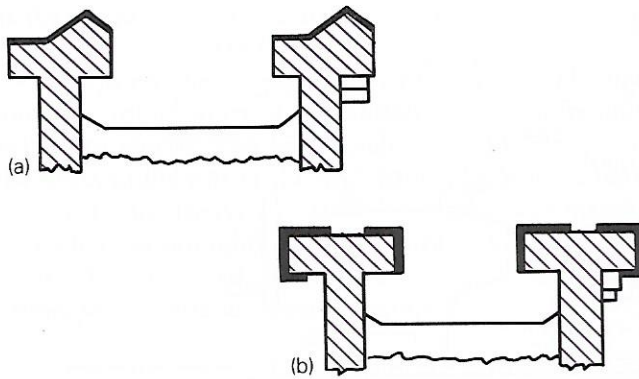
Types of lathe bed: (a) vee bed section; (b) flat bed section.
